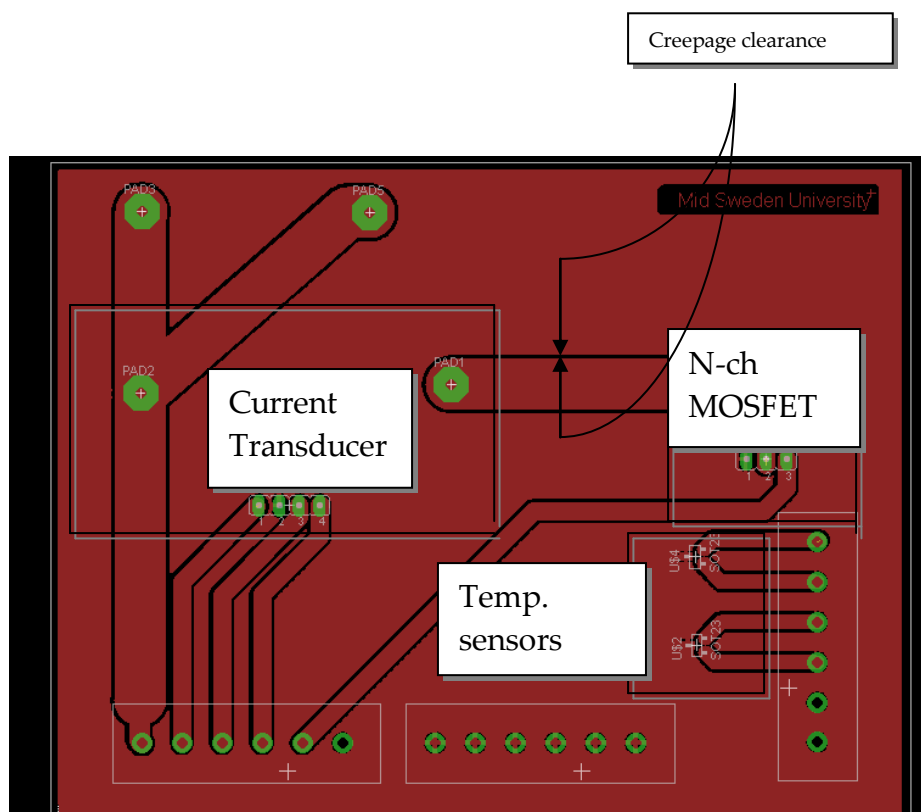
Printed Circuit Board (PCB) design in Cad Soft eagle version (6.1.0)
